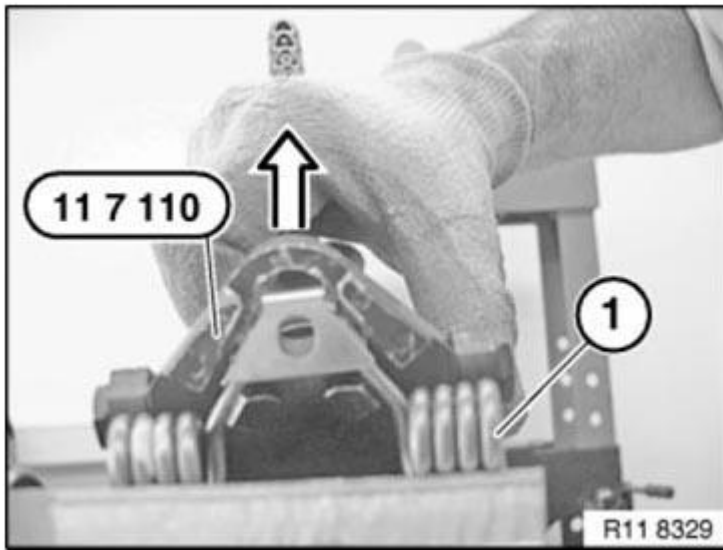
Releasing Knurled Screw On Special Tool (11 7 110)
